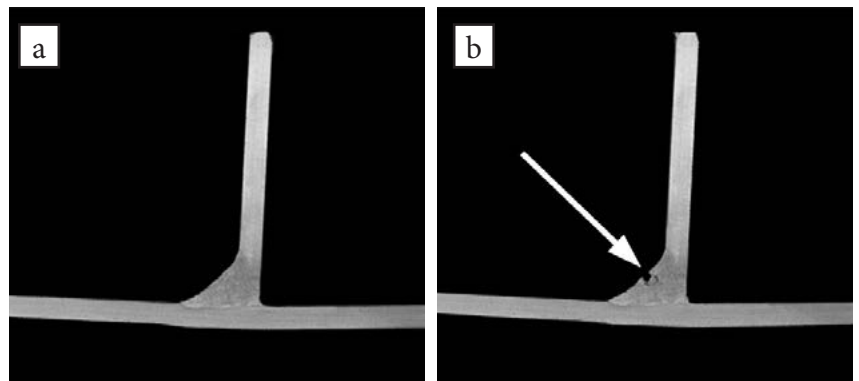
T-joint macrostructure: a) initial section, b) section with the scratch in the weld face (marked with the arrow)
